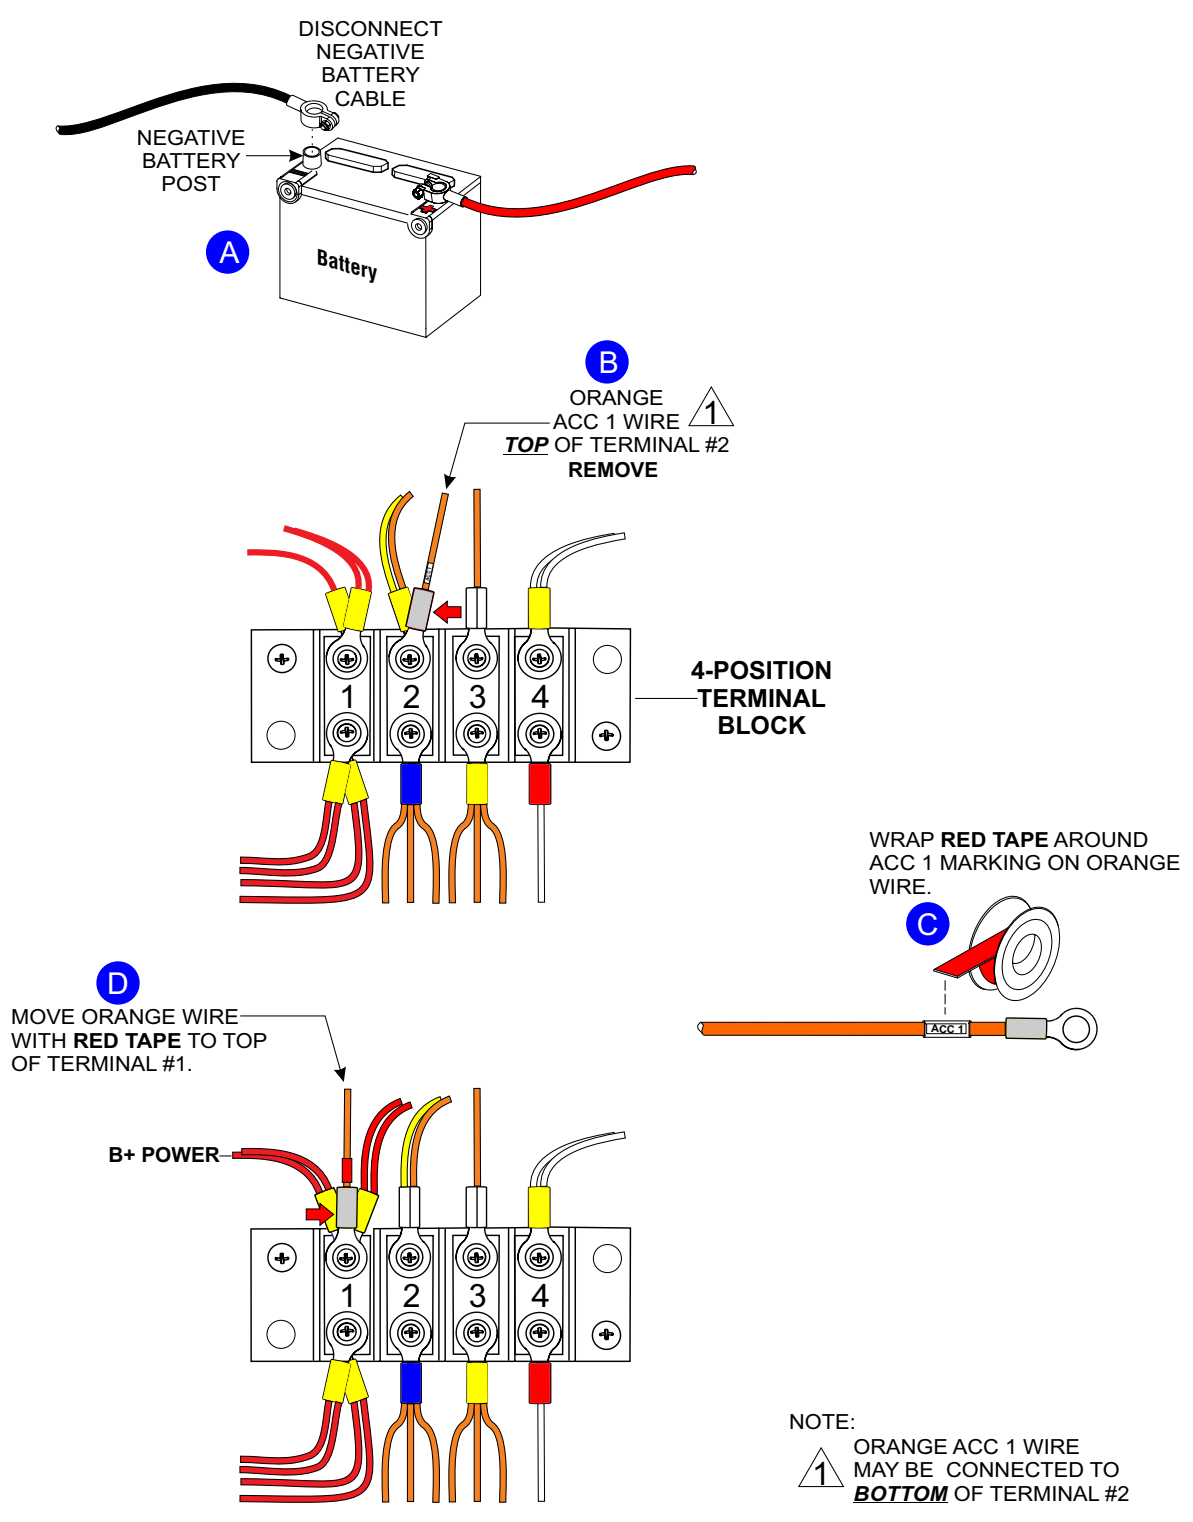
Emergency Stop Switch Wiring (4-Position Terminal Block)
